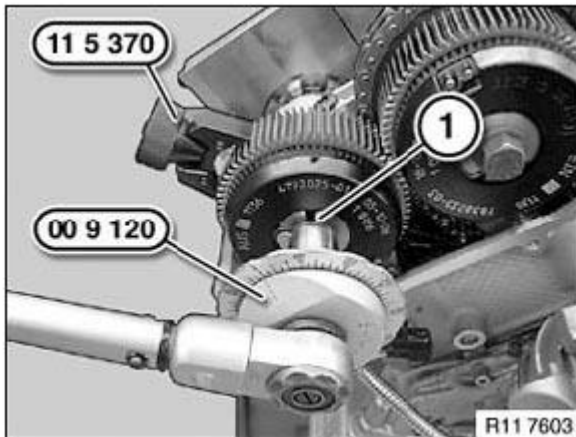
Securing Central Bolt Using Special Tool (00 9 120)
